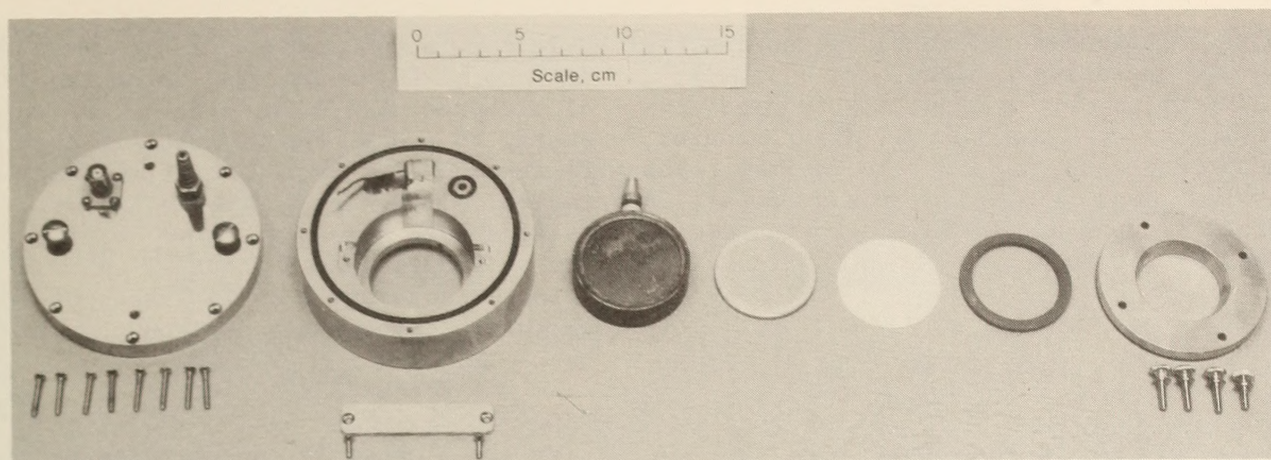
Unassembled model B-100 CWL detector. From left to right: back cover plate with signal and air connectors, housing for Geiger-Mueller (GM) tube with GM tube clamp and O-ring seals, pancake-type GM tube, filter backup screen, glass-fiber filter, rubber filter gasket, and filter clamping plate with retaining screws.
